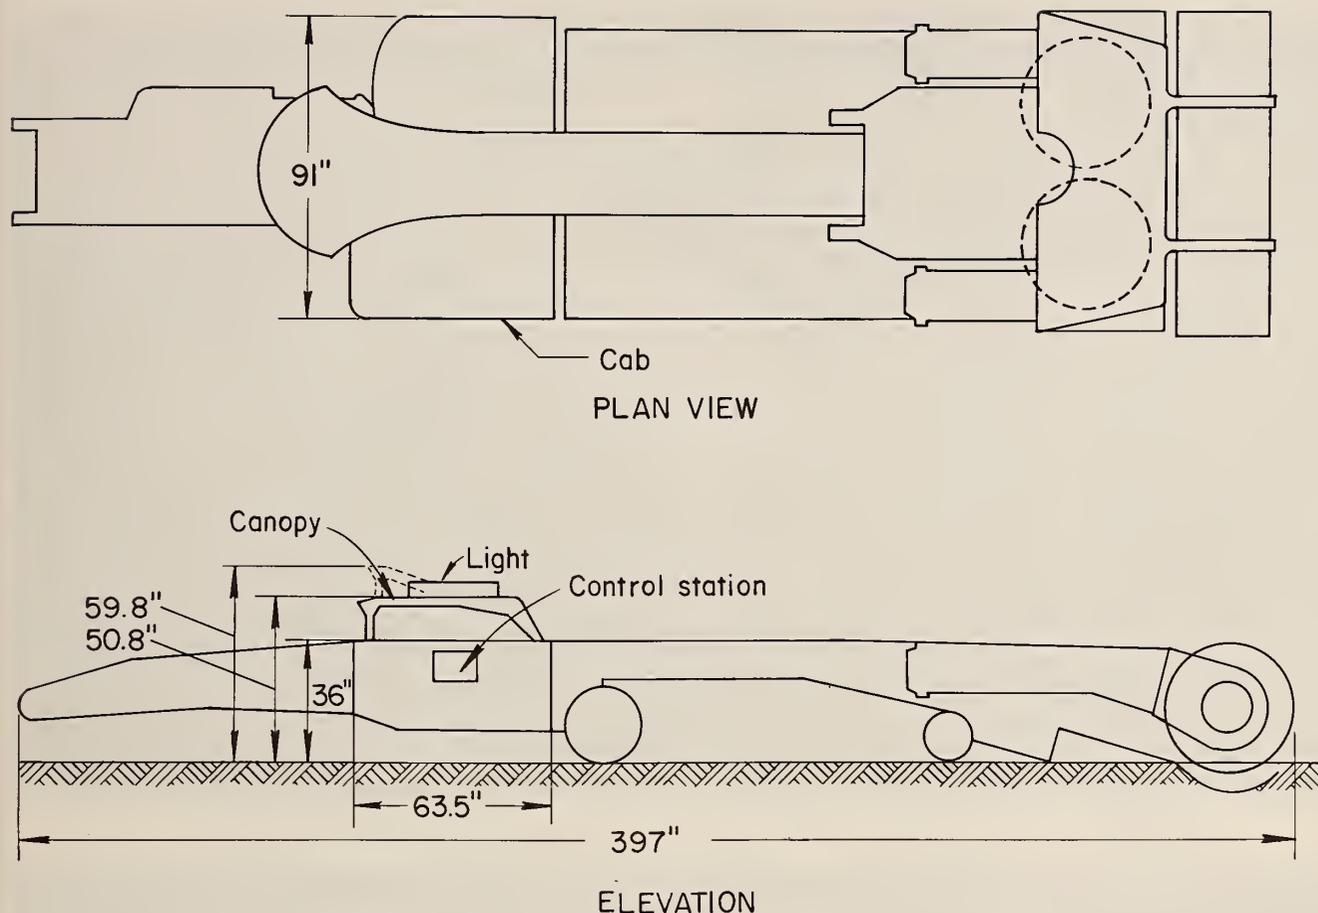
Layout drawing of LN 800 continuous miner.
